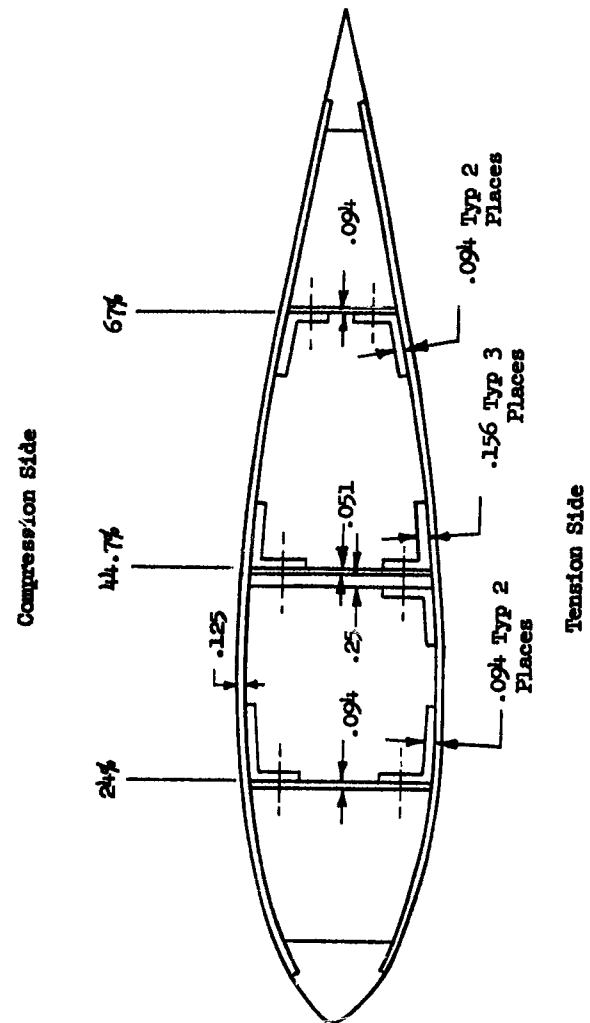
TYPICAL SECTION OUTSIDE OF FAILURE RAY
